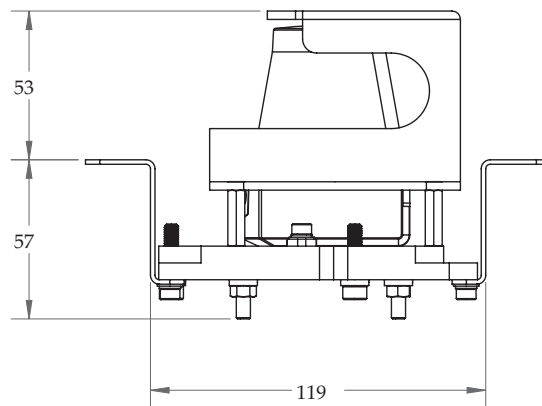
Side laser assembly side view dimensions (units in mm)
